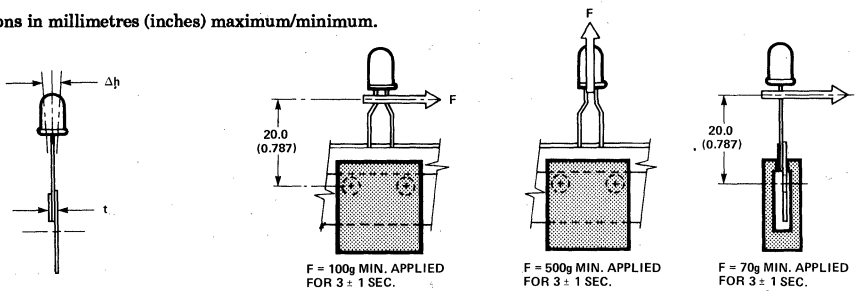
Front to Rear Alignment and Tape Thickness, Typical All Device Types.
